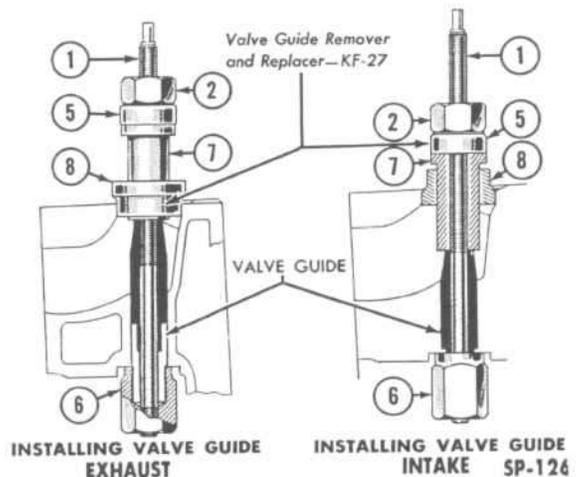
INSTALLING VALVE GUIDE IN CYLINDER BLOCK
